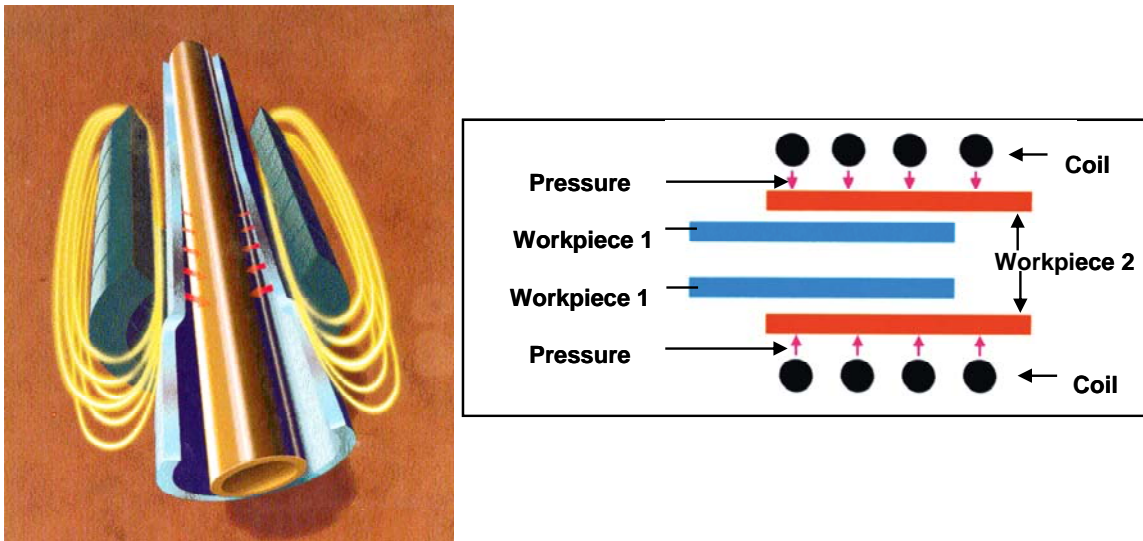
Magnetic Pulse Welding Process Schematic
